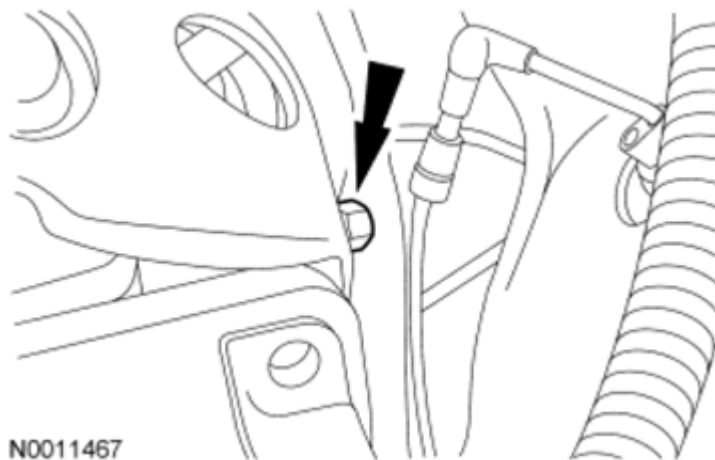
Locating Intake Manifold Crash Bracket Stud Bolt
